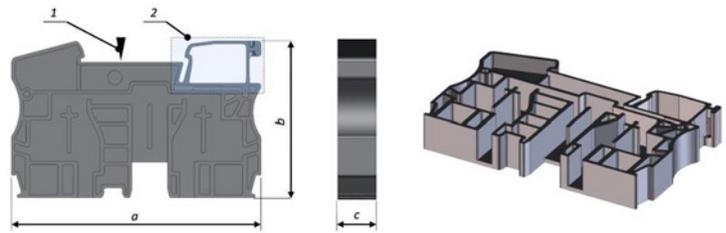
The model of the electrical connector fitted with flexible joint parts: a = 80,2 mm, b = 50,6 mm, c = 12,2 mm, 1 – injection point, 2 – the forming area of the flexible installation foot qualified for selective induction heating
